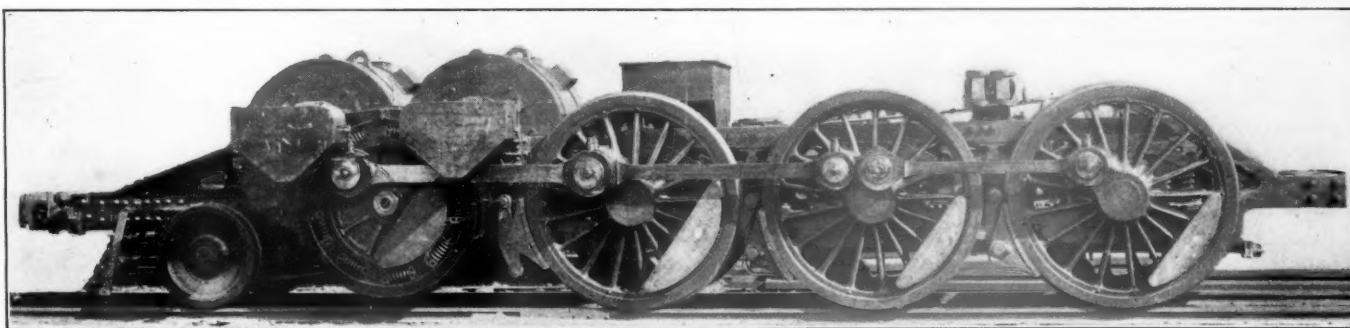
One of the Two Driving Trucks Showing Motors and Spring Gear Jack Shaft
